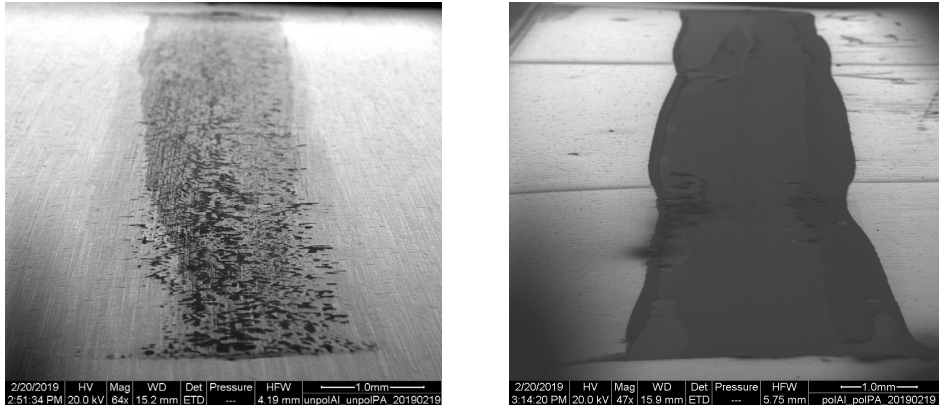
The Al surface after tensile shear test of welded specimen a) Category A of surface pre-treatment, b) Category D of surface pre-treatment.
